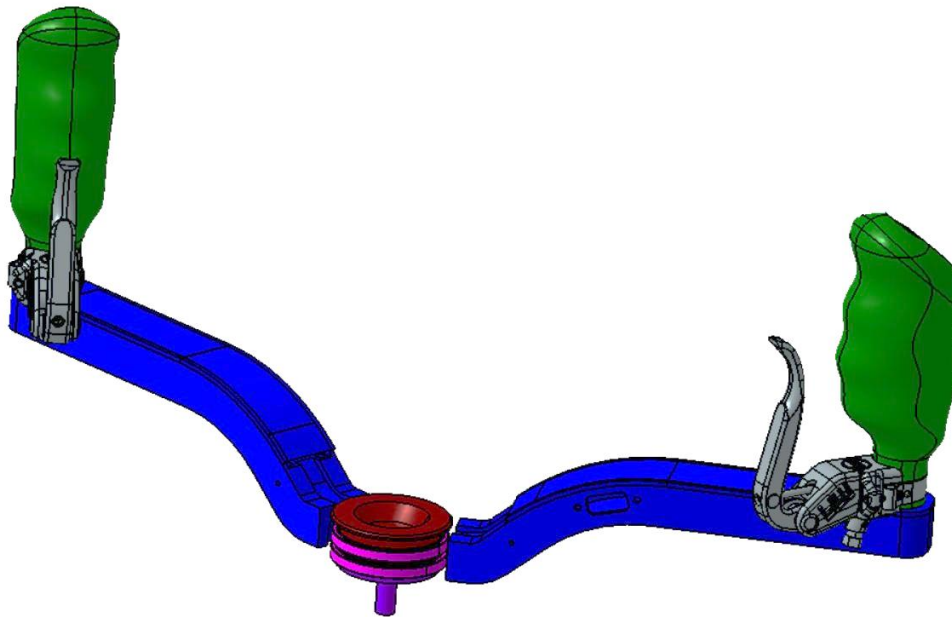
Steering system eLi15-upper part, CAD drawing (2015, TUfast)
